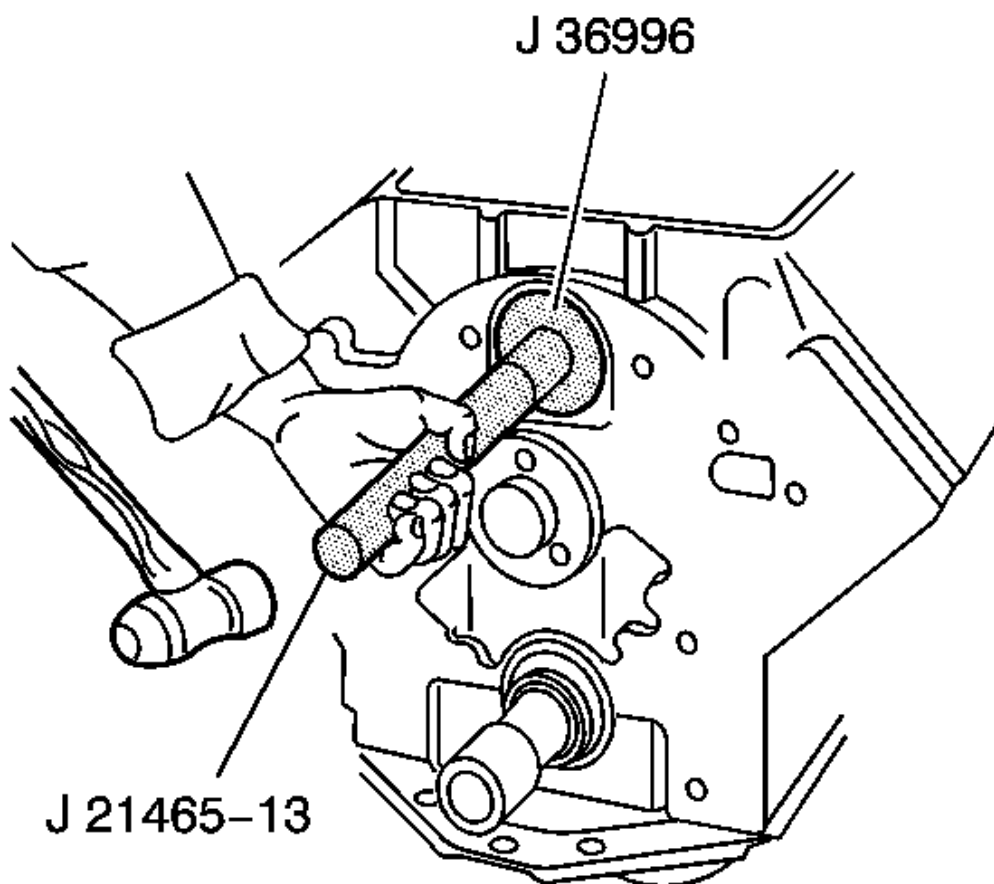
Installing Balance Shaft in Engine Block with J 36996
